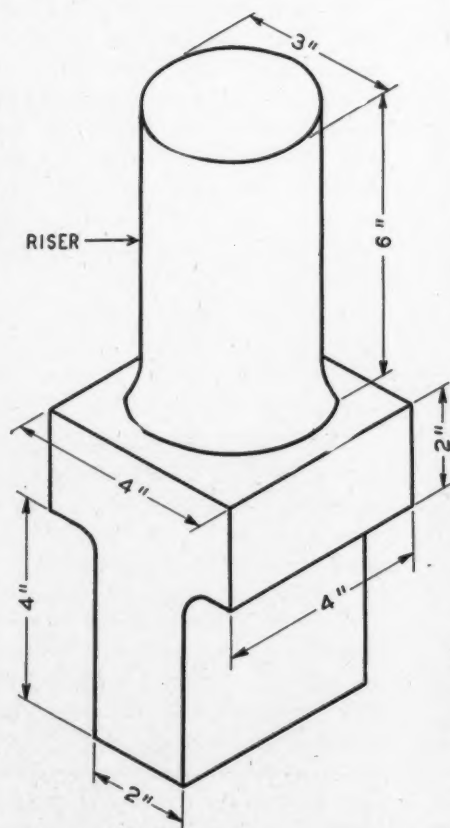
Diagrammatic sketch of keel block test casting showing dimensions.
